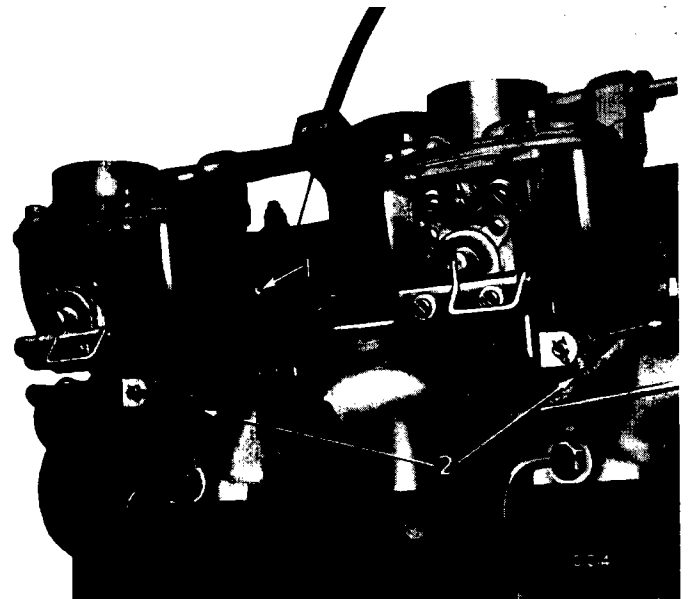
R.H. view of carburettors, showing mixture control screws (2) and throttle stop screws (1)
